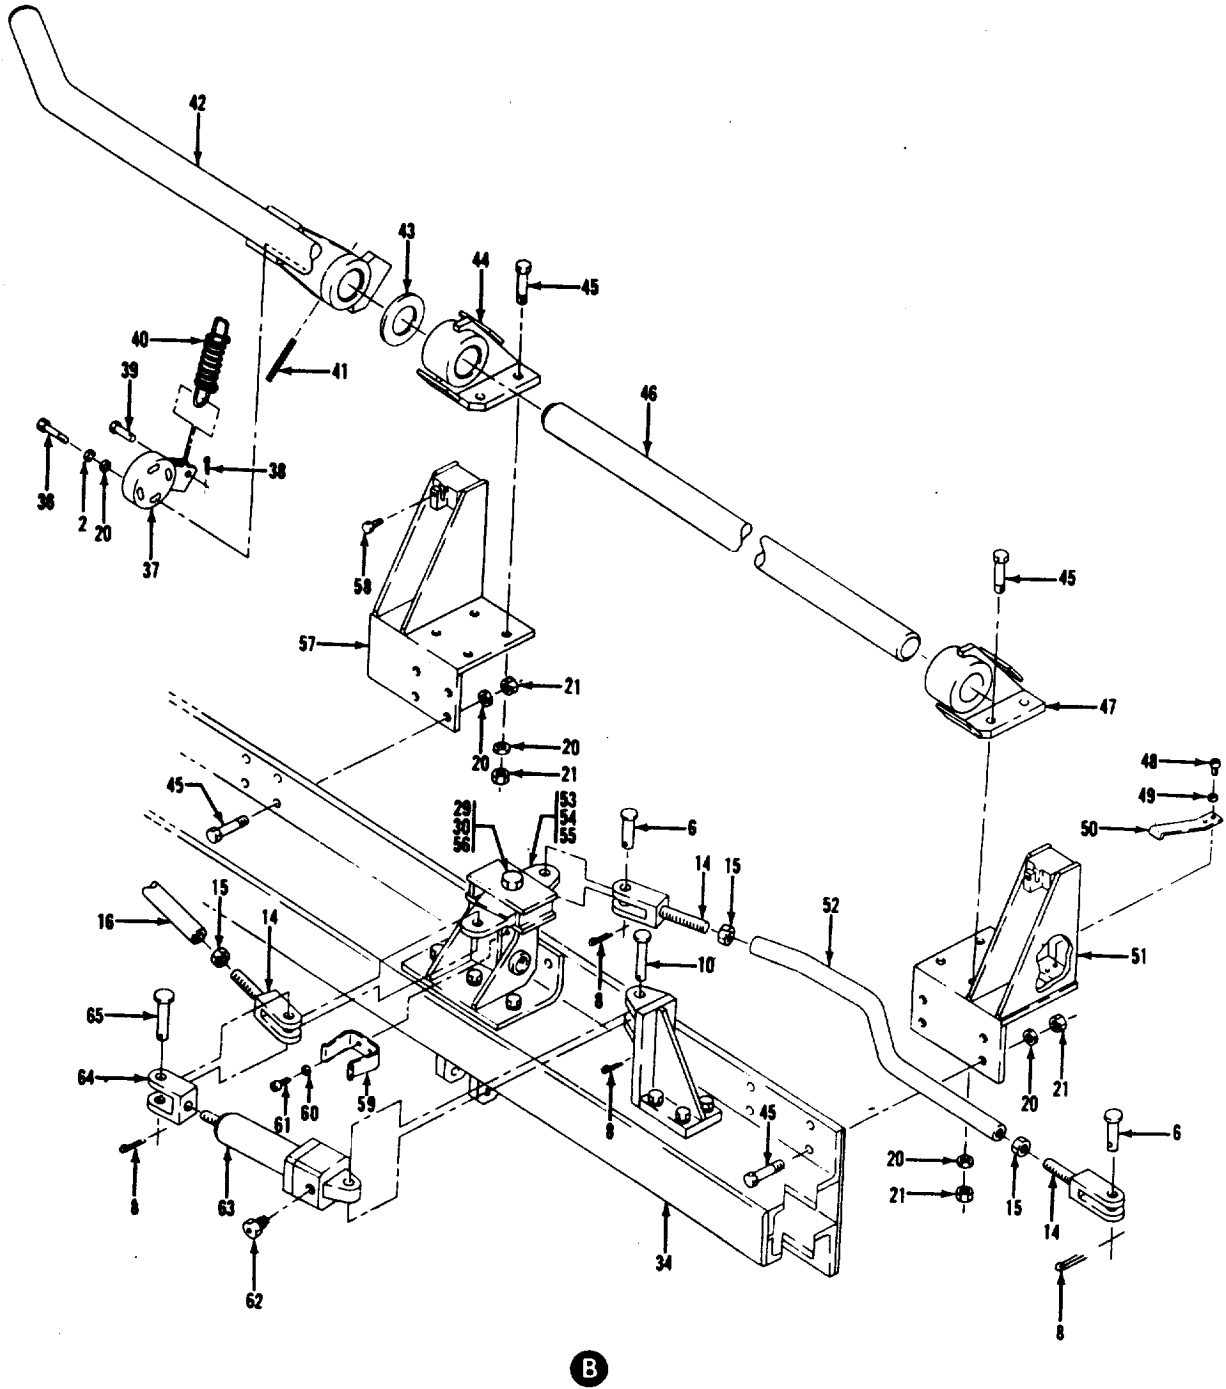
LES Coupler Assembly (Sheet 3 of 9)
